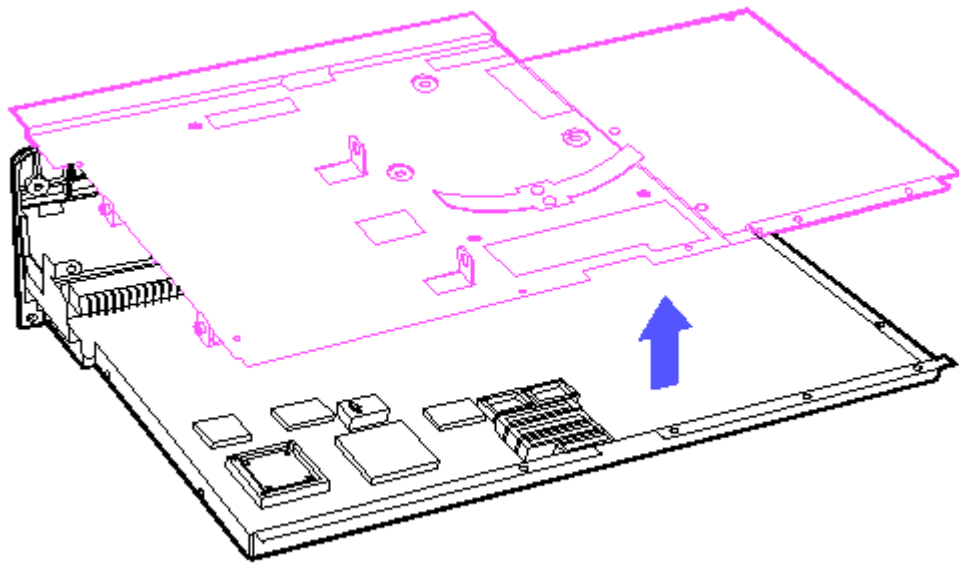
Removing the Drive Mounting Plate from the System Board
